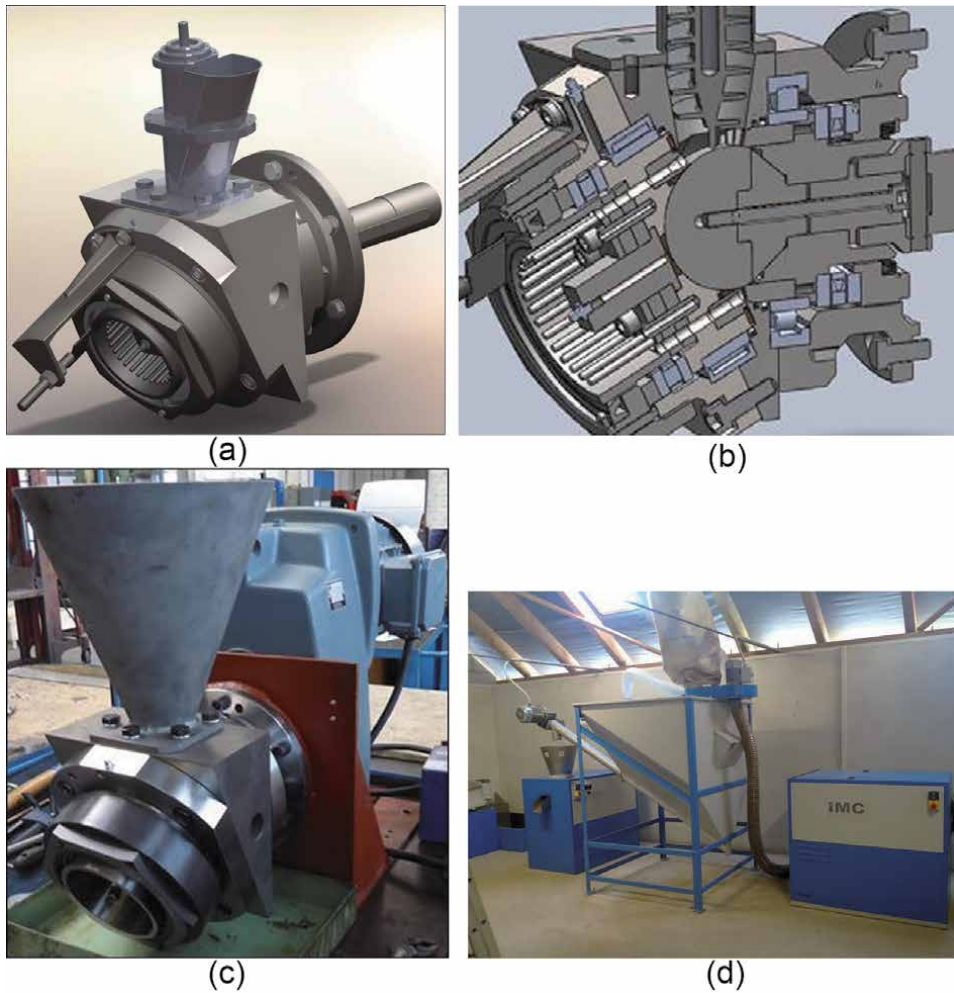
Innovative spherical pellet machine (V4). (a) 3D model, (b) cut of the chamber, (c) prototype, variant V4 and (d) pellet in IMC line.
